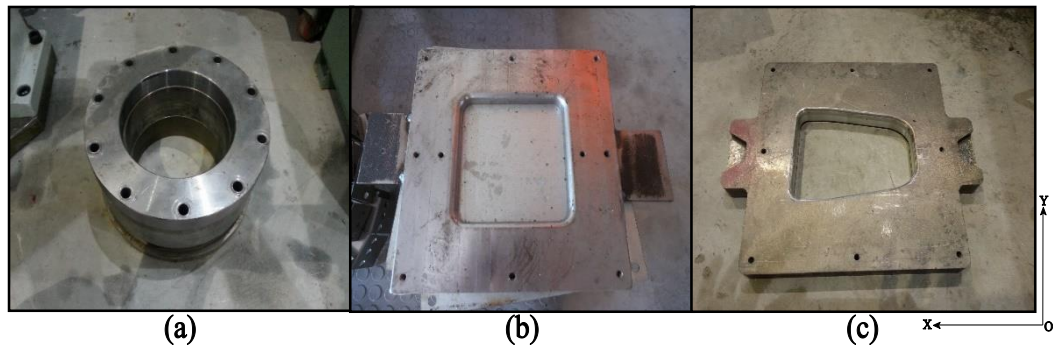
The backing plates used in manufacturing of workpieces, (a) used for truncated cones, (b) used for pyramidal shapes and (c) used for real car component.
